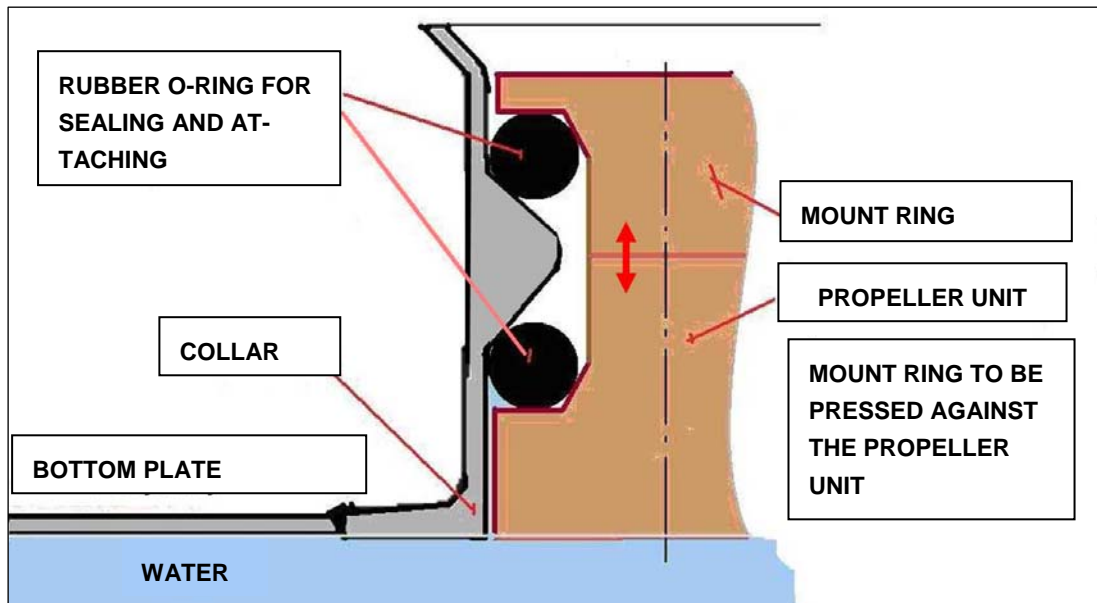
The installation of a drive unit to the mount collar of the hull with two large O-rings and a mount ring. The drawing only illustrates the principle of how the installation is done.
